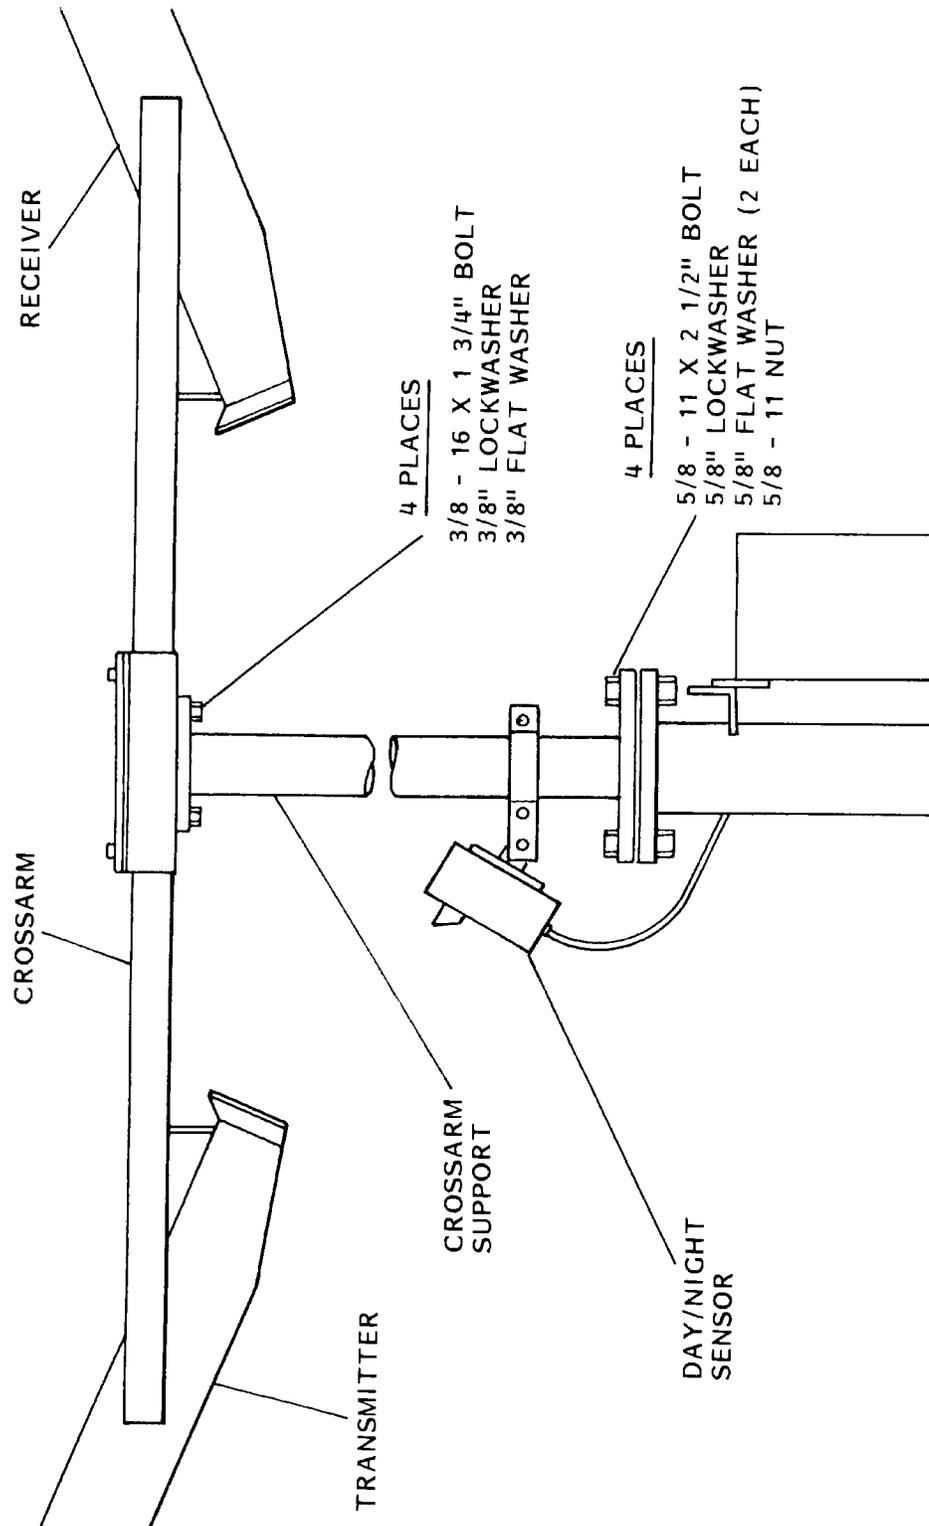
Crossarm/Support and Day/Night Sensor Installation
